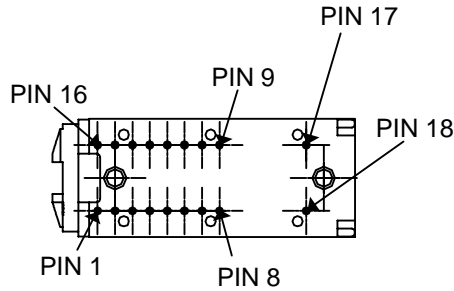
KC4210PCB Keyceptacle Orthographic Drawing
